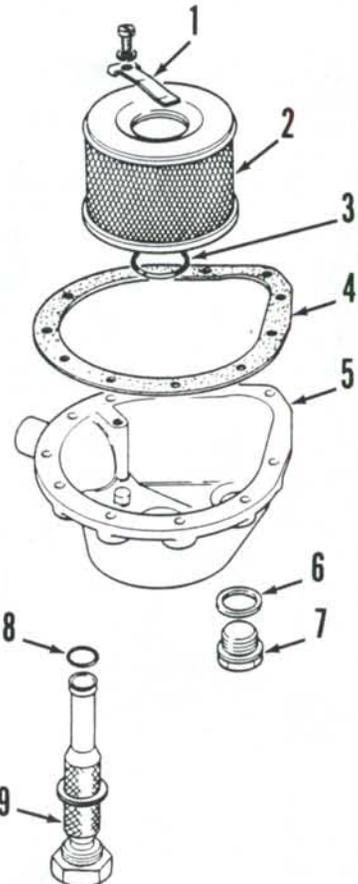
Exploded view of hydraulic suction filter assembly used on Models 1494 and 1594. Models 1390, 1394, 1490 and 1690 are similar. Filter screen (9) is used on power shift models only.
